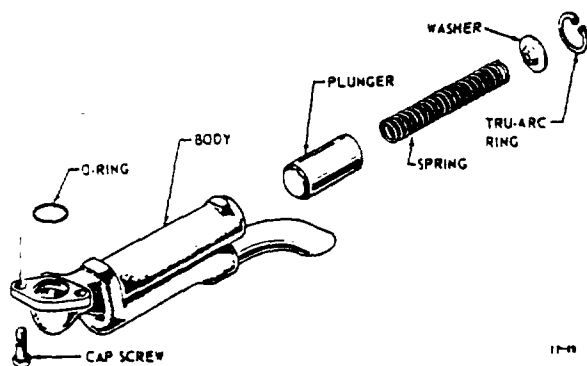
Pressure Relief Valve Assembly END864 Series
